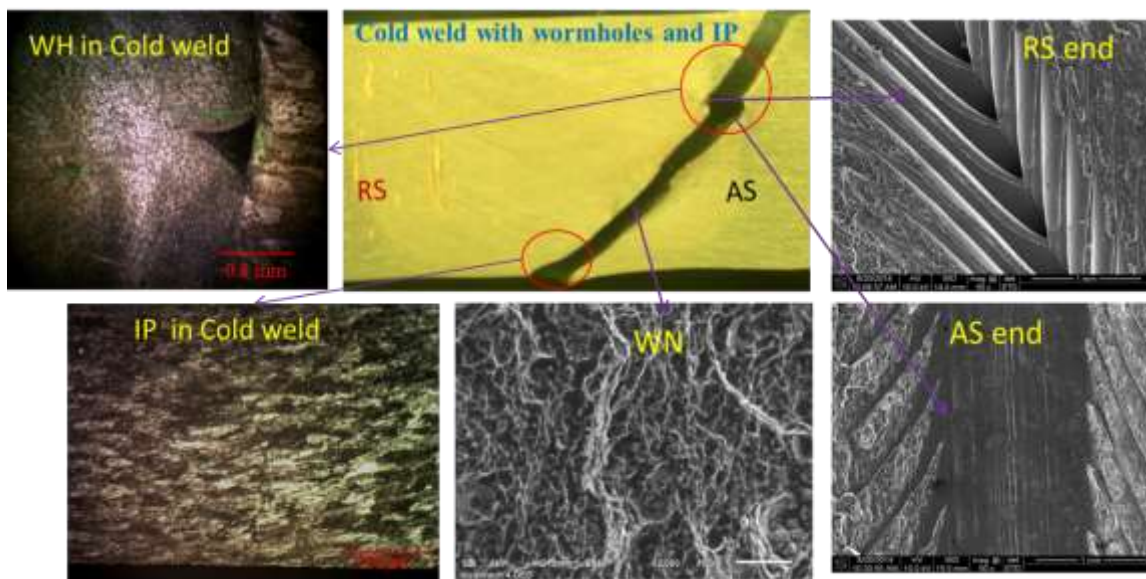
Cold weld showing internal cavity. Fracture is on the AS of tool inside the weld nugget. Fracture surface exhibits ductile fracture dimples, smaller corresponding to nugget material. Unbonded cavity surface appears to exhibit surface ripples.
